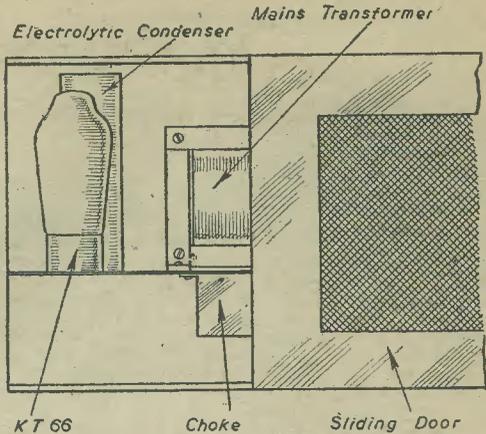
Rear view of Fig. 3, showing sliding door and part of assembly.
